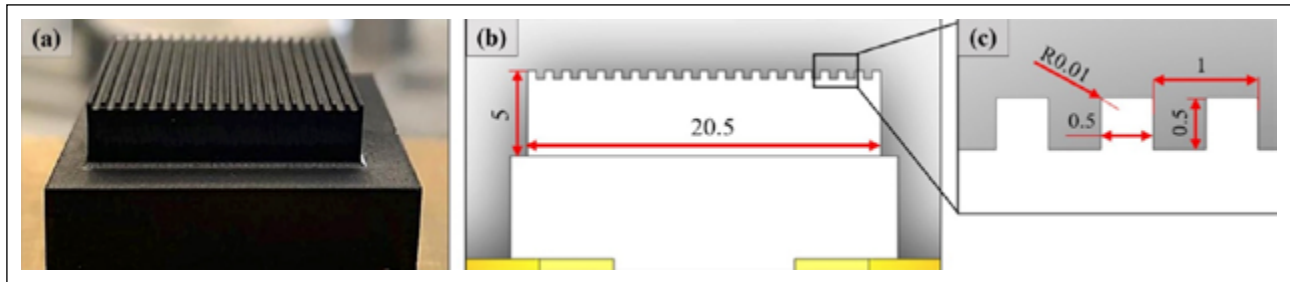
(a) Graphite electrode with multiple channels, (b) cross-sectional technical drawing of the surface pattern, and (c) dimensions of micro-patterns.
